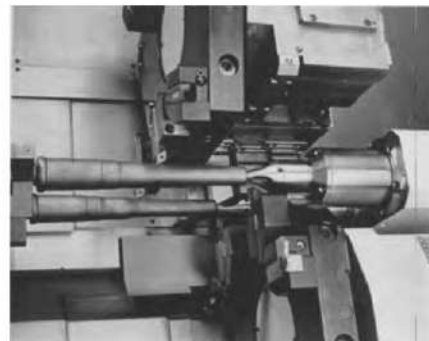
Twin-spindle CNC turning centre (Courtesy, Georg Fischer, Switzerland)
